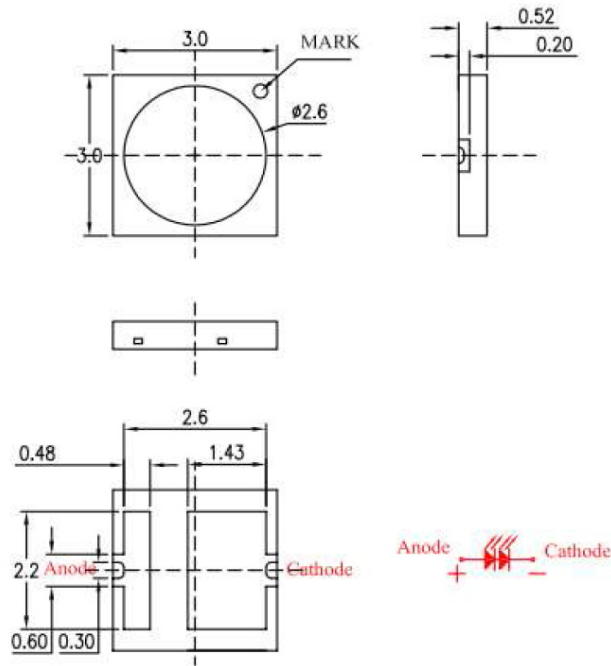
Mechanical Drawing for LUXEON 3030 2D. All dimensions are in millimeters.
